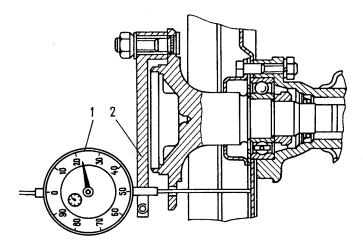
Measuring Axle-Shaft End Play with Wheel and Brake Drum Removed:
